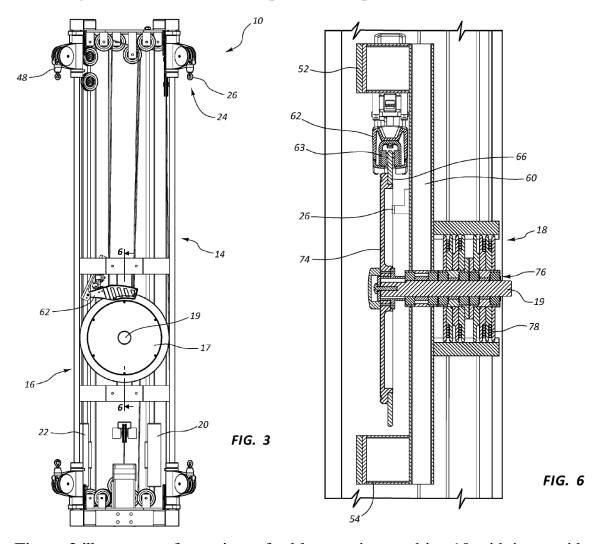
illustrates a front view of cable exercise machine 10 with its outside cover removed. *Id.* at 4:28–29, 6:19–22. Figure 6 is a cross-sectional view of the resistance mechanism of cable exercise machine 10. *Id.* at 8:31–32.
